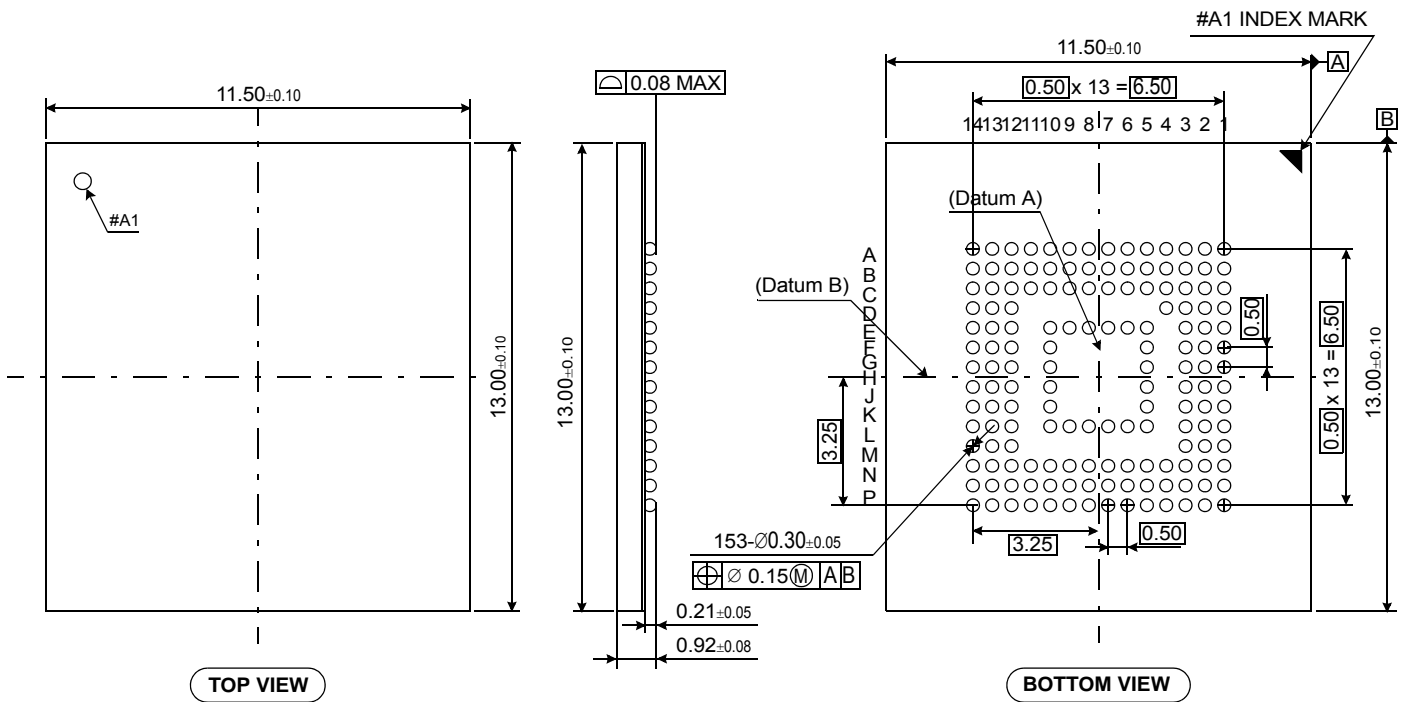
11.5mm x 13mm x 1.0mm Package Dimension
